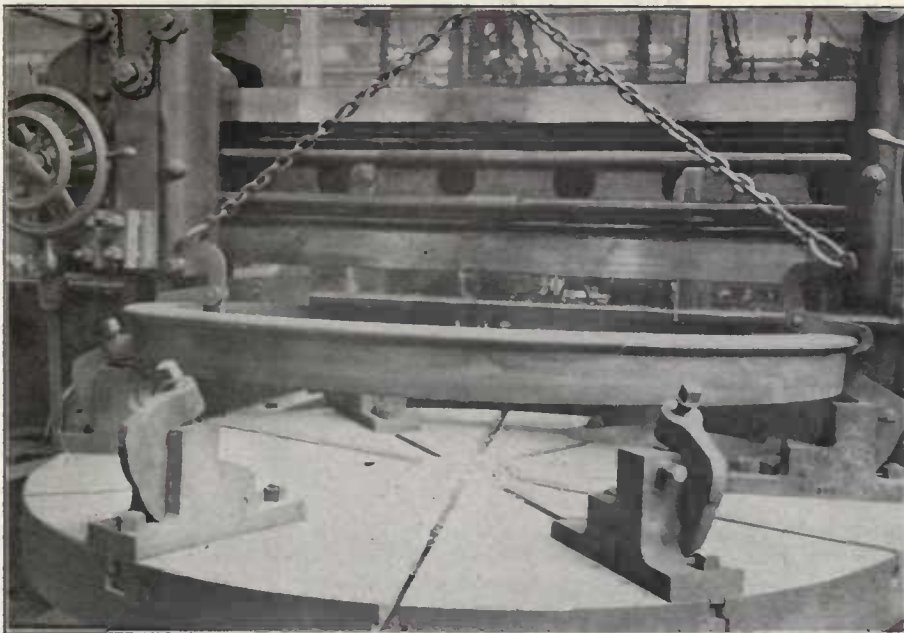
Driving Wheel Tire About to be Placed in the Chucks.
